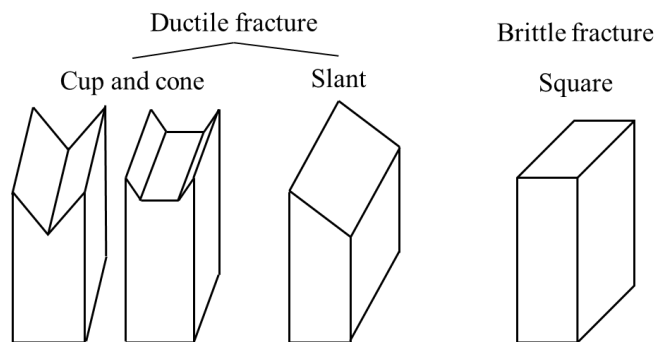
Schematic of macrofractography of the fracture surface.
